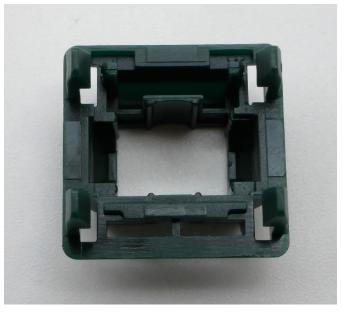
Gecko top housing interior showing similarities to Gateron Oil Kings as well as mold markings in the upper left-and right-hand side corners.
